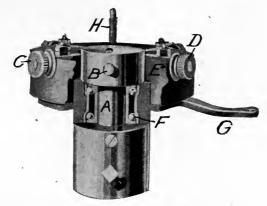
Splitdorf Timer, Wipe Contact Type.
